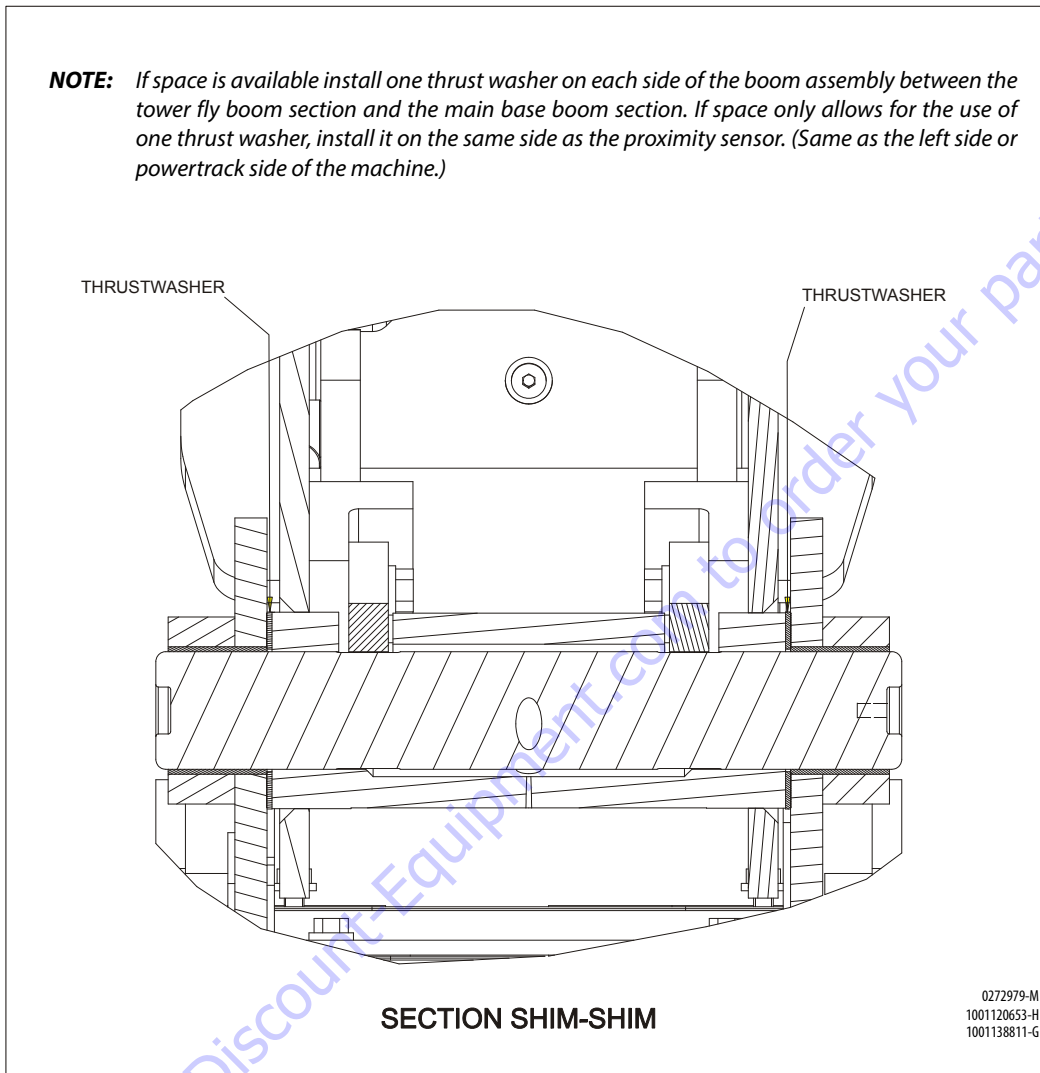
Boom & Cylinder Installation - Sheet 5 of 5
